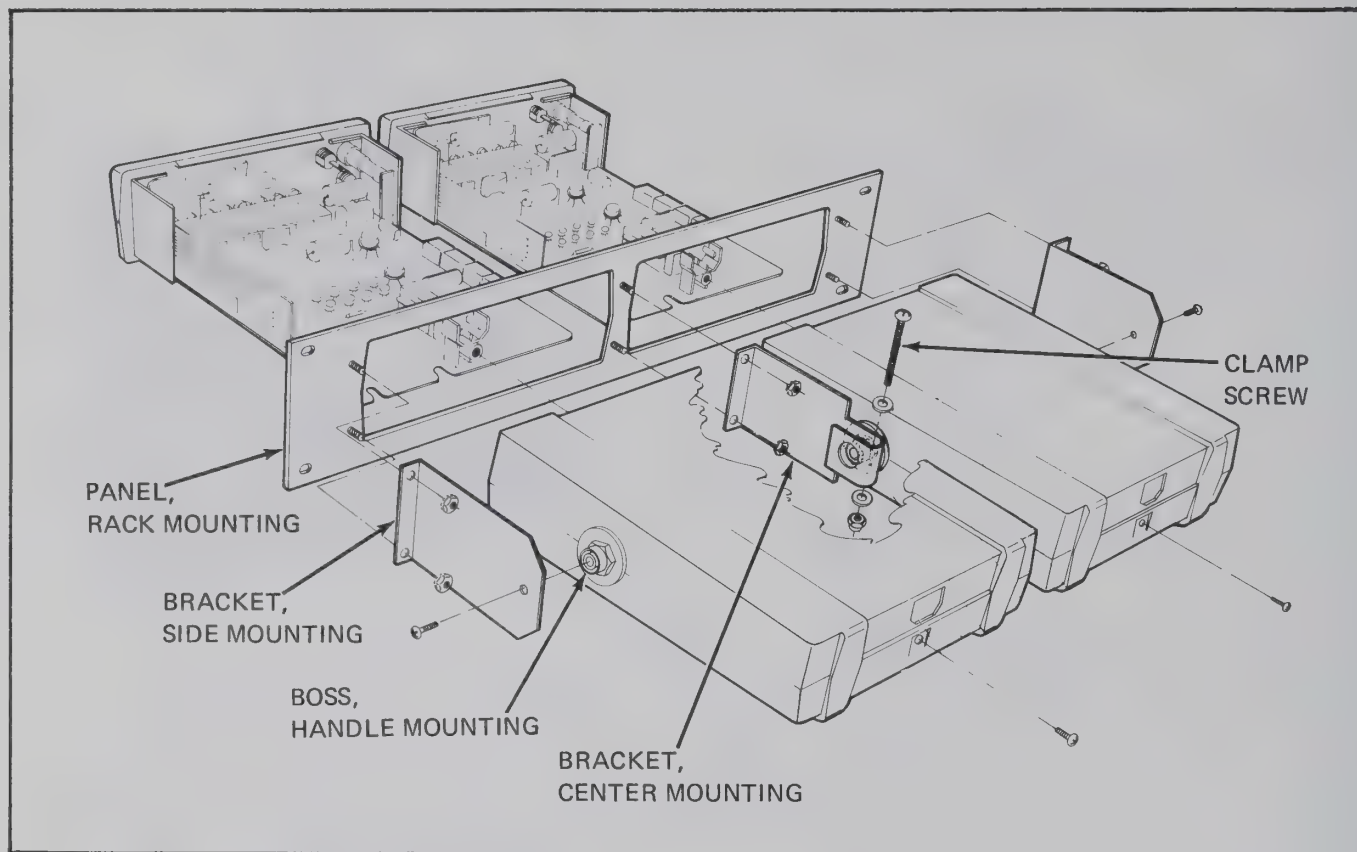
RACK MOUNTING KIT, SIDE-BY-SIDE MOUNTING
